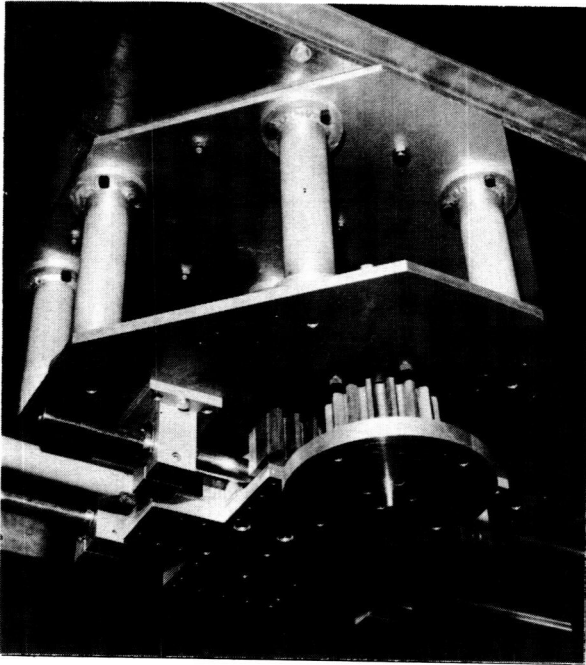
Linear and Rotational Drive Mechanism and Mount for Base of DSA
